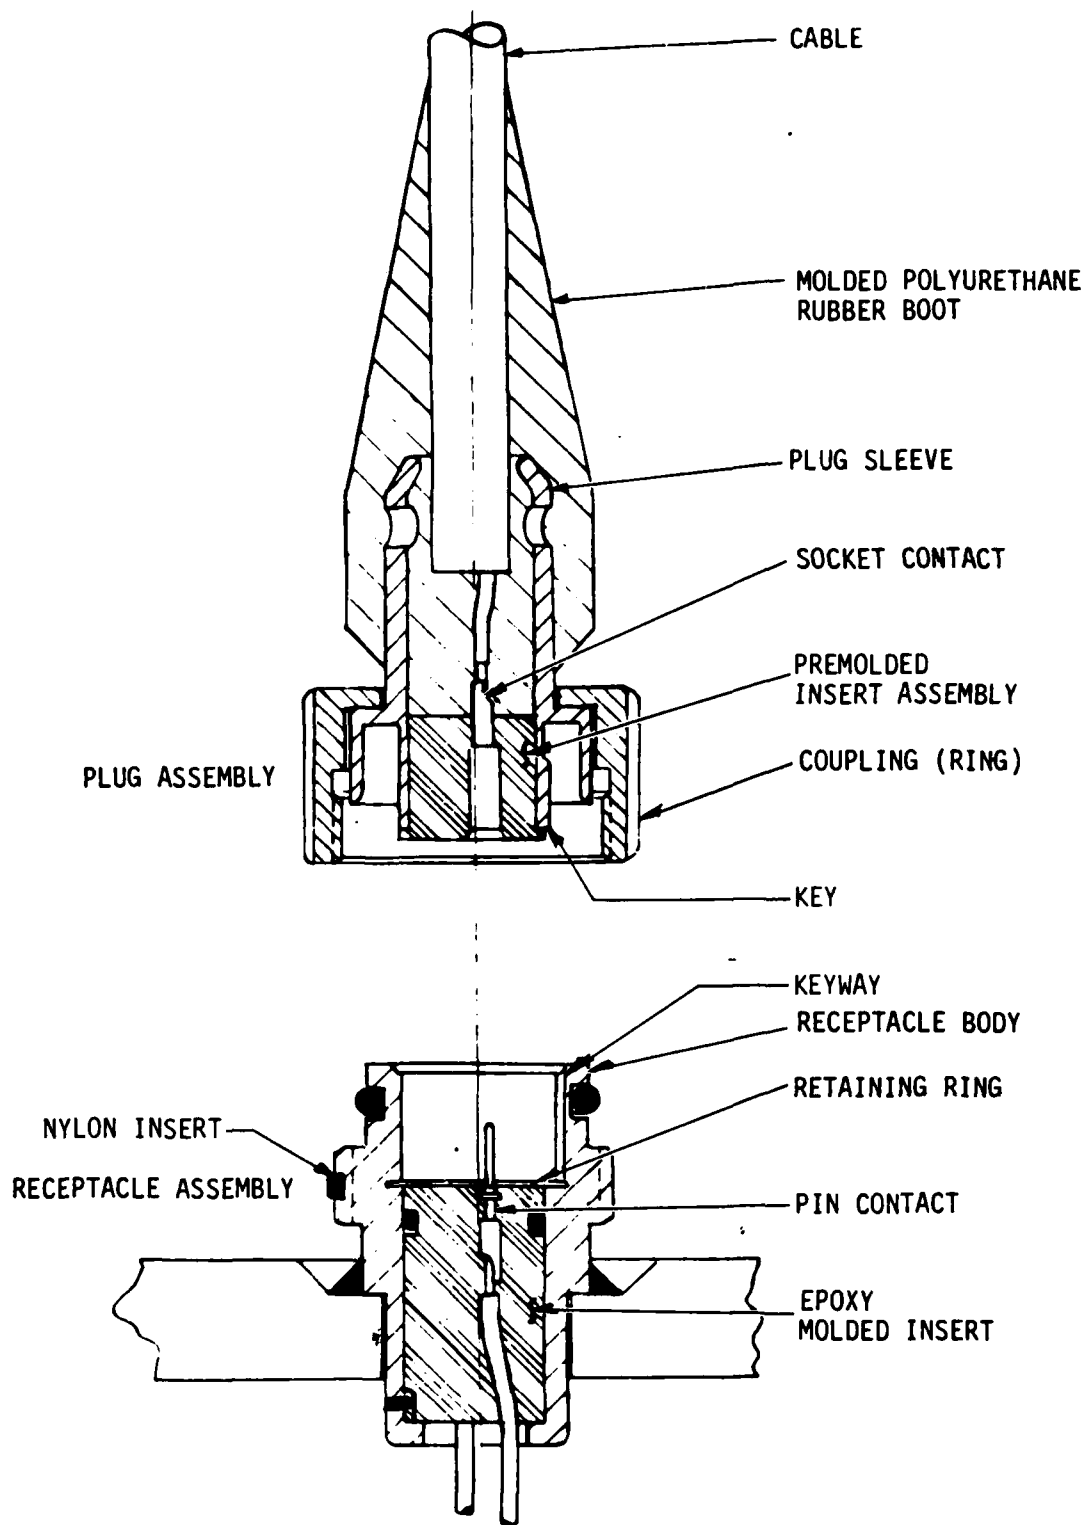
MIL-C-24231 CONNECTOR ASSEMBLY
